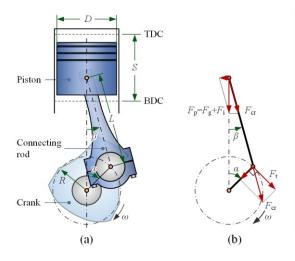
Diesel engine cylinder torque: (a) diagram of the engine-kinematic; (b) forces acting on crank mechanism.
